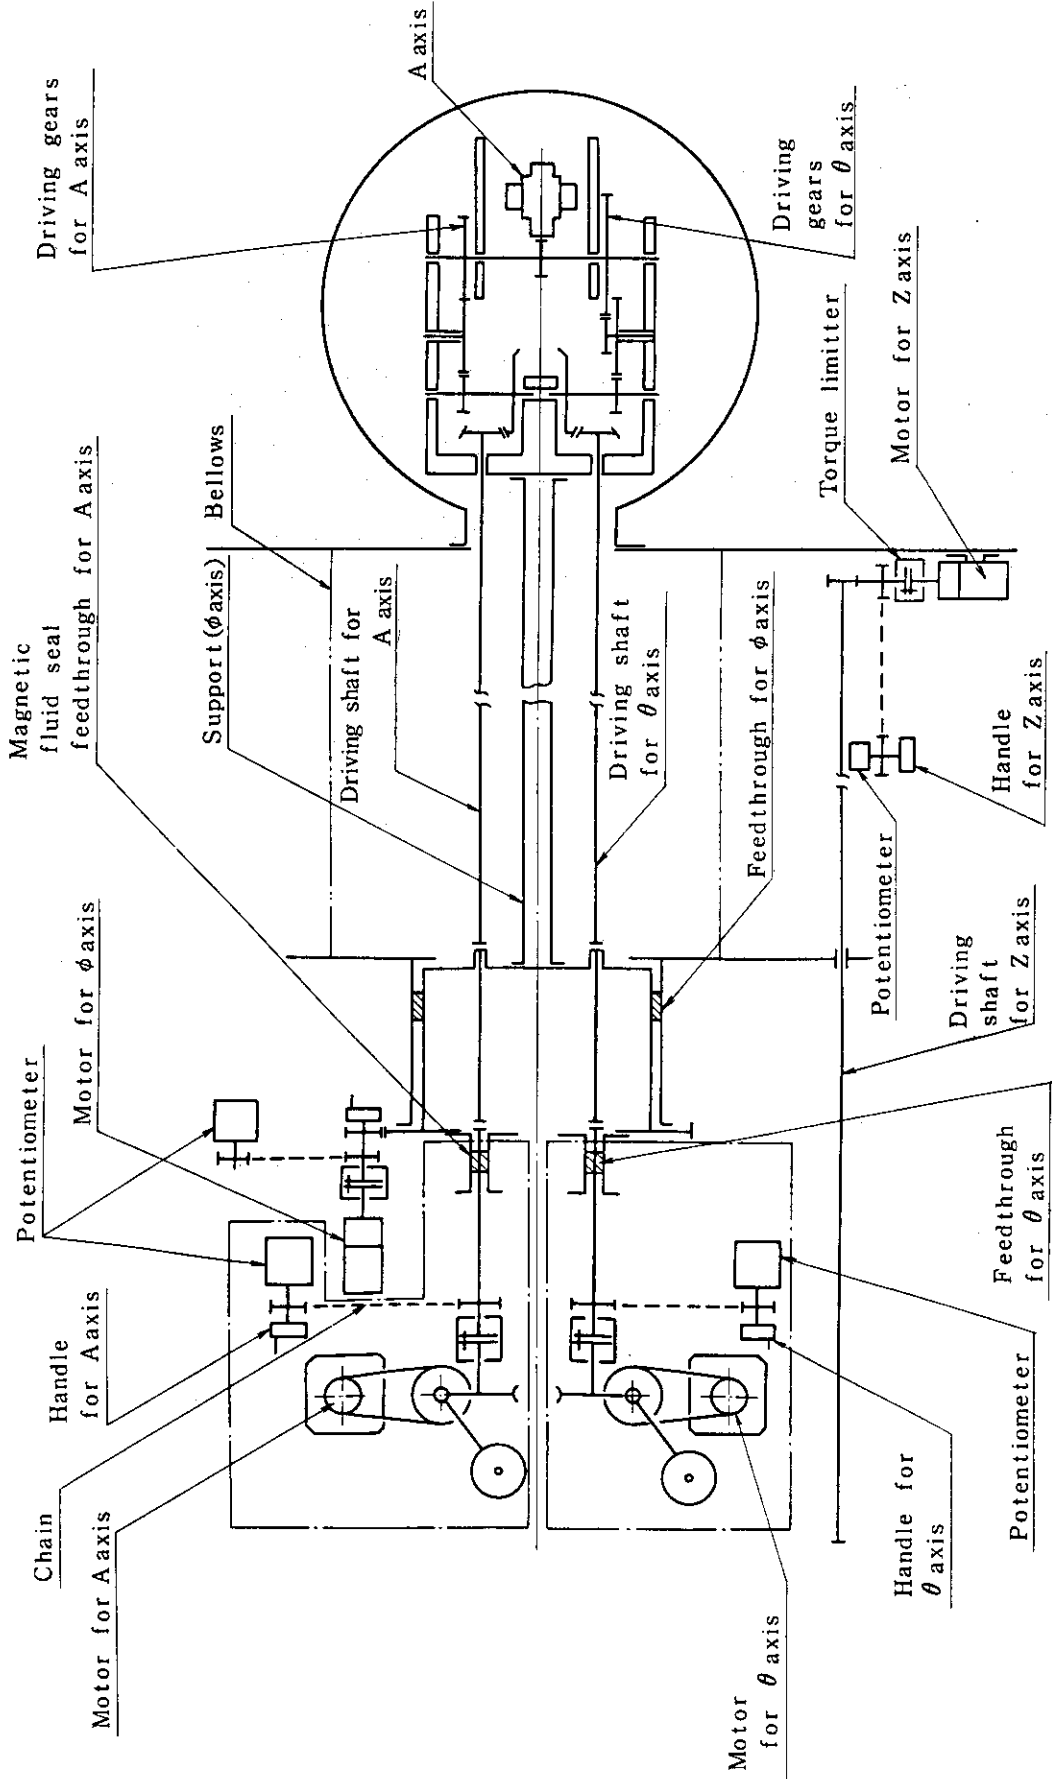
Driving mechanism of the prototype manipulator arm.
